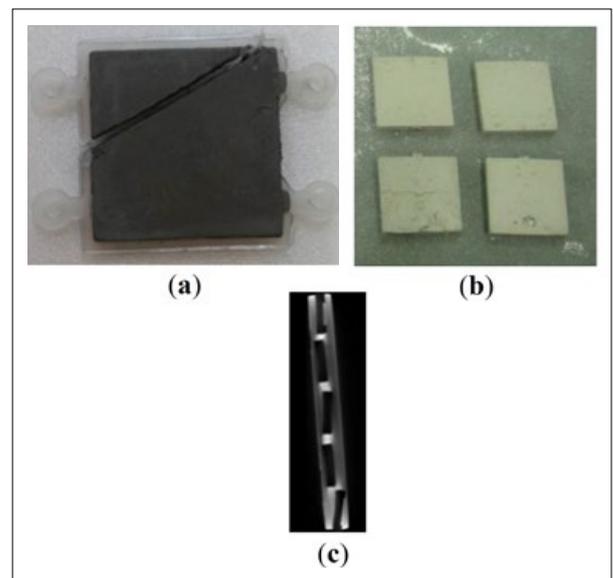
Green parts and sintered parts: (a) green part; (b) sintered part; and (c) section view of sintered part
